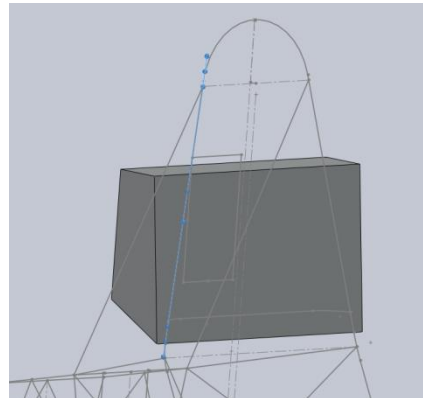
Edge view of the plane for final shaping of the head rest mount boss. Material was removed to the left as shown.
